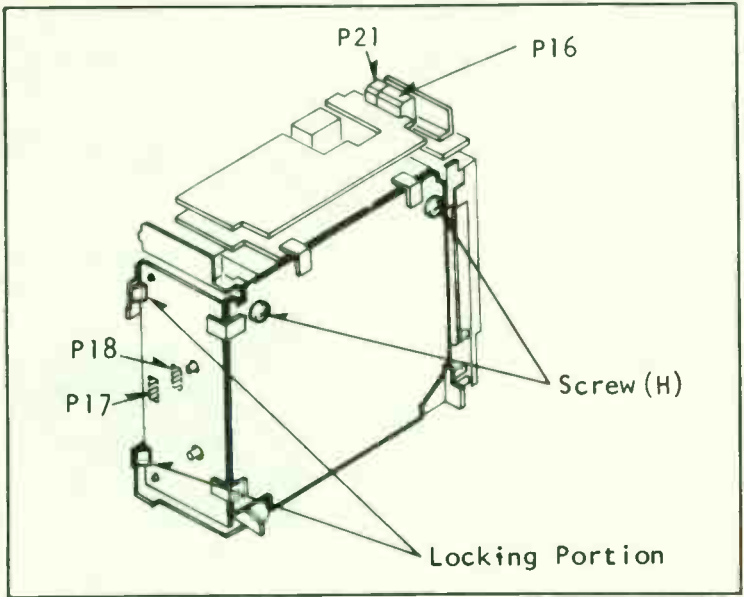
Opening the PC boards for servicing (courtesy of General Electric).
